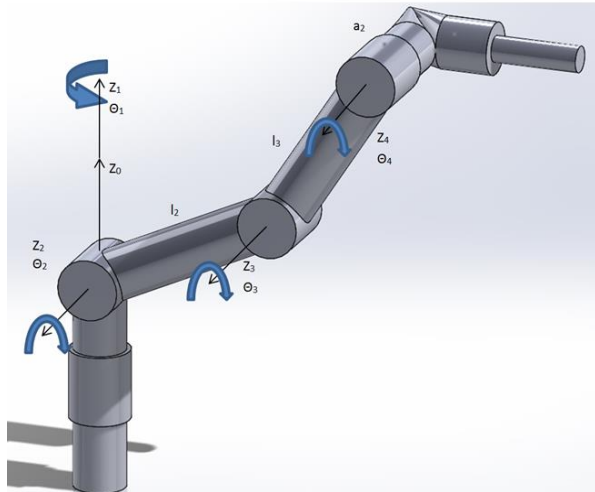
Positioning, rotation angles, and parametric measurements of the axes for the tapping machine.
